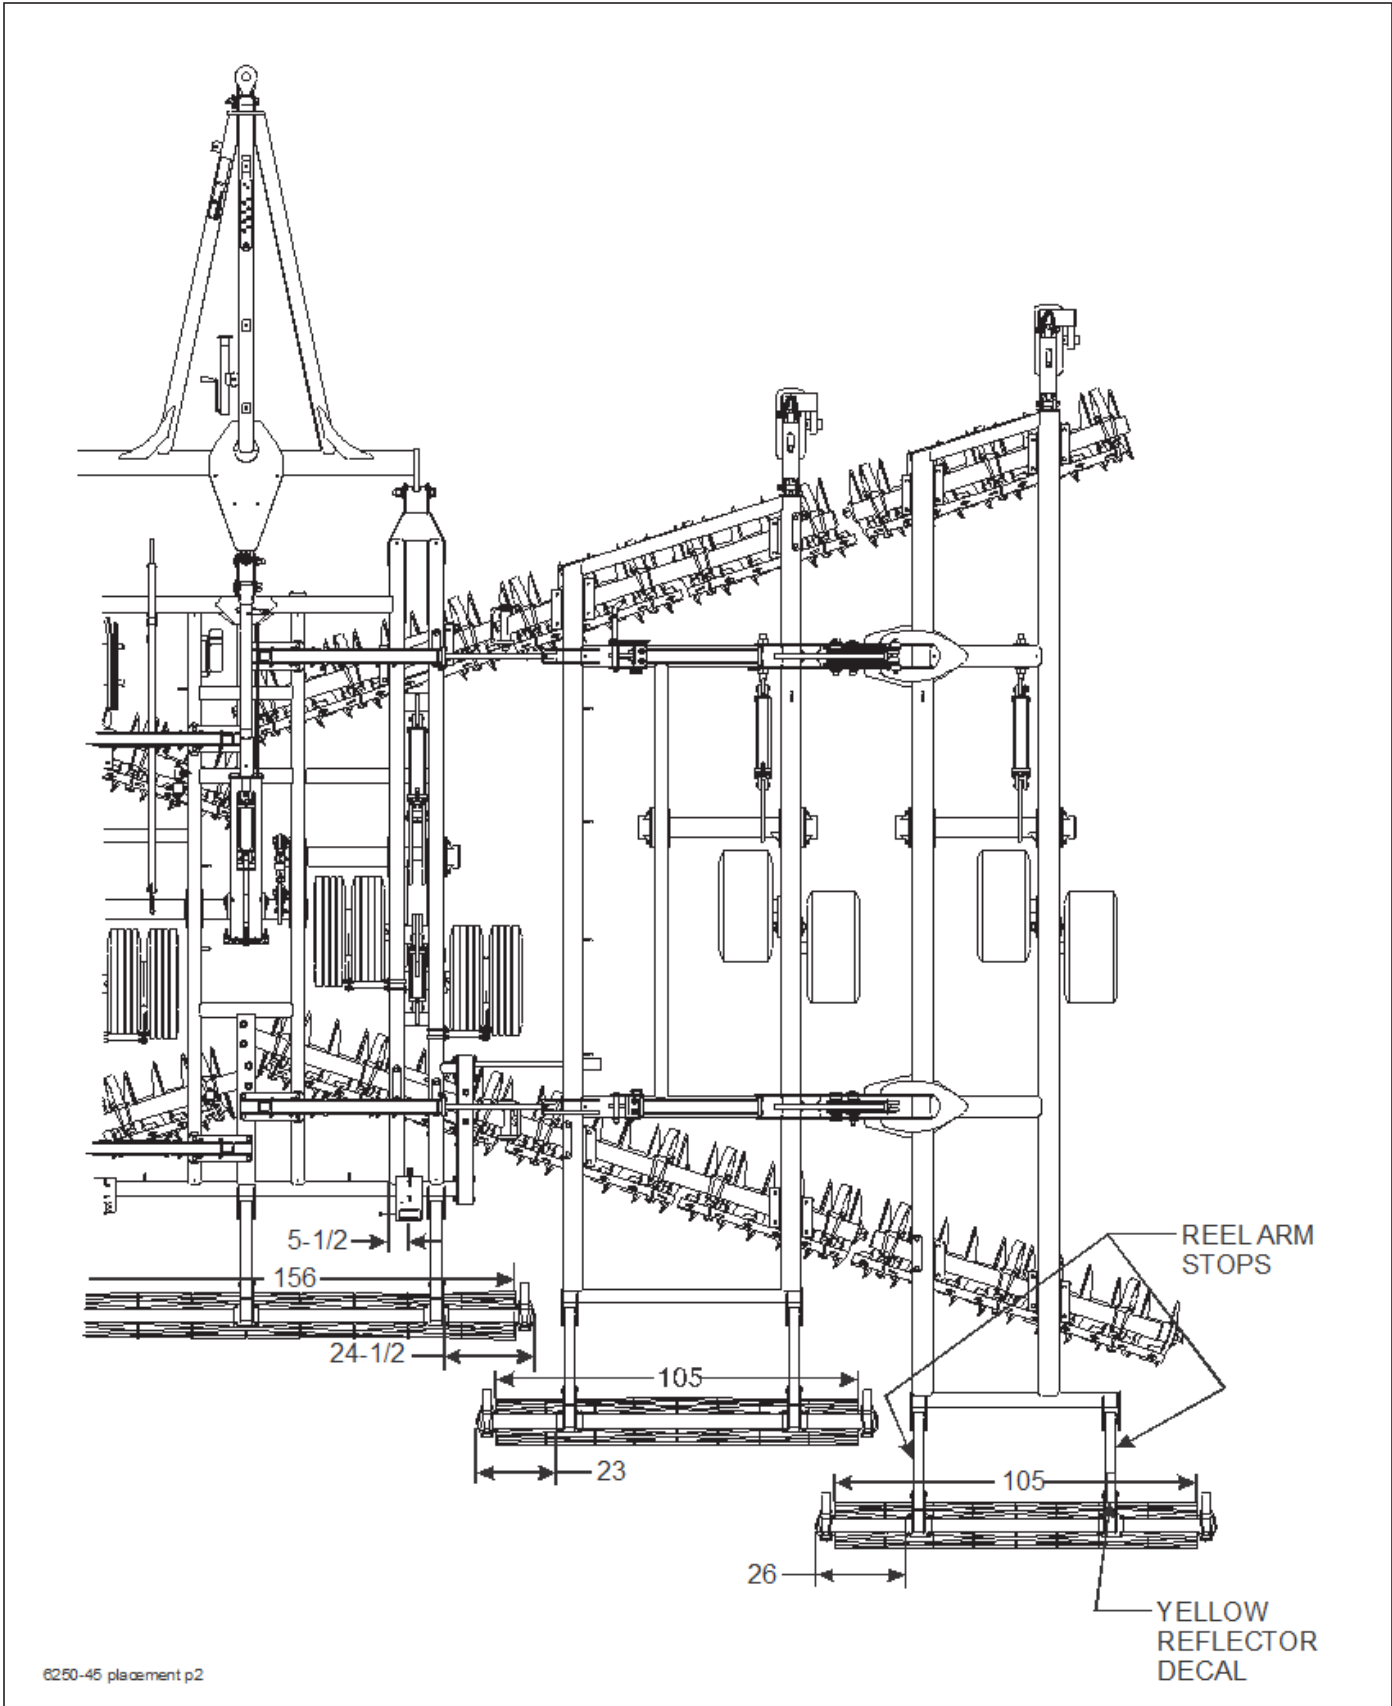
Wing Stabilizer and Light Bracket Placement (45' Model)
